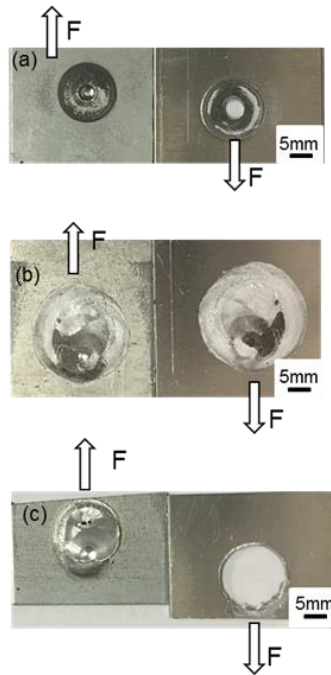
Failure modes for (a) FSSW (b) Pure circle path welding (c) Keyhole refilled FSSW
